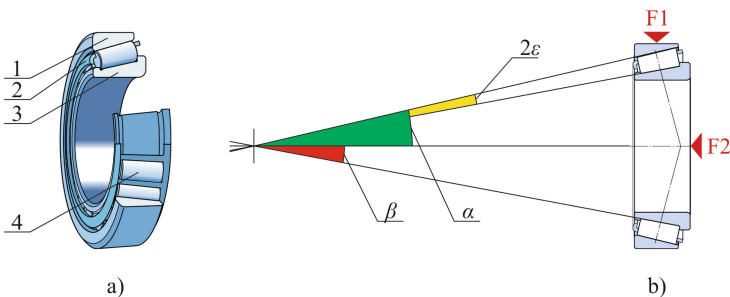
Construction: 1 – outer ring (fixed); 2 – separator; 3 – inner ring (movable); 4 – rolling elements a) and the scheme of the tapered roller bearing $\beta = \alpha - 2\varepsilon$ b).
